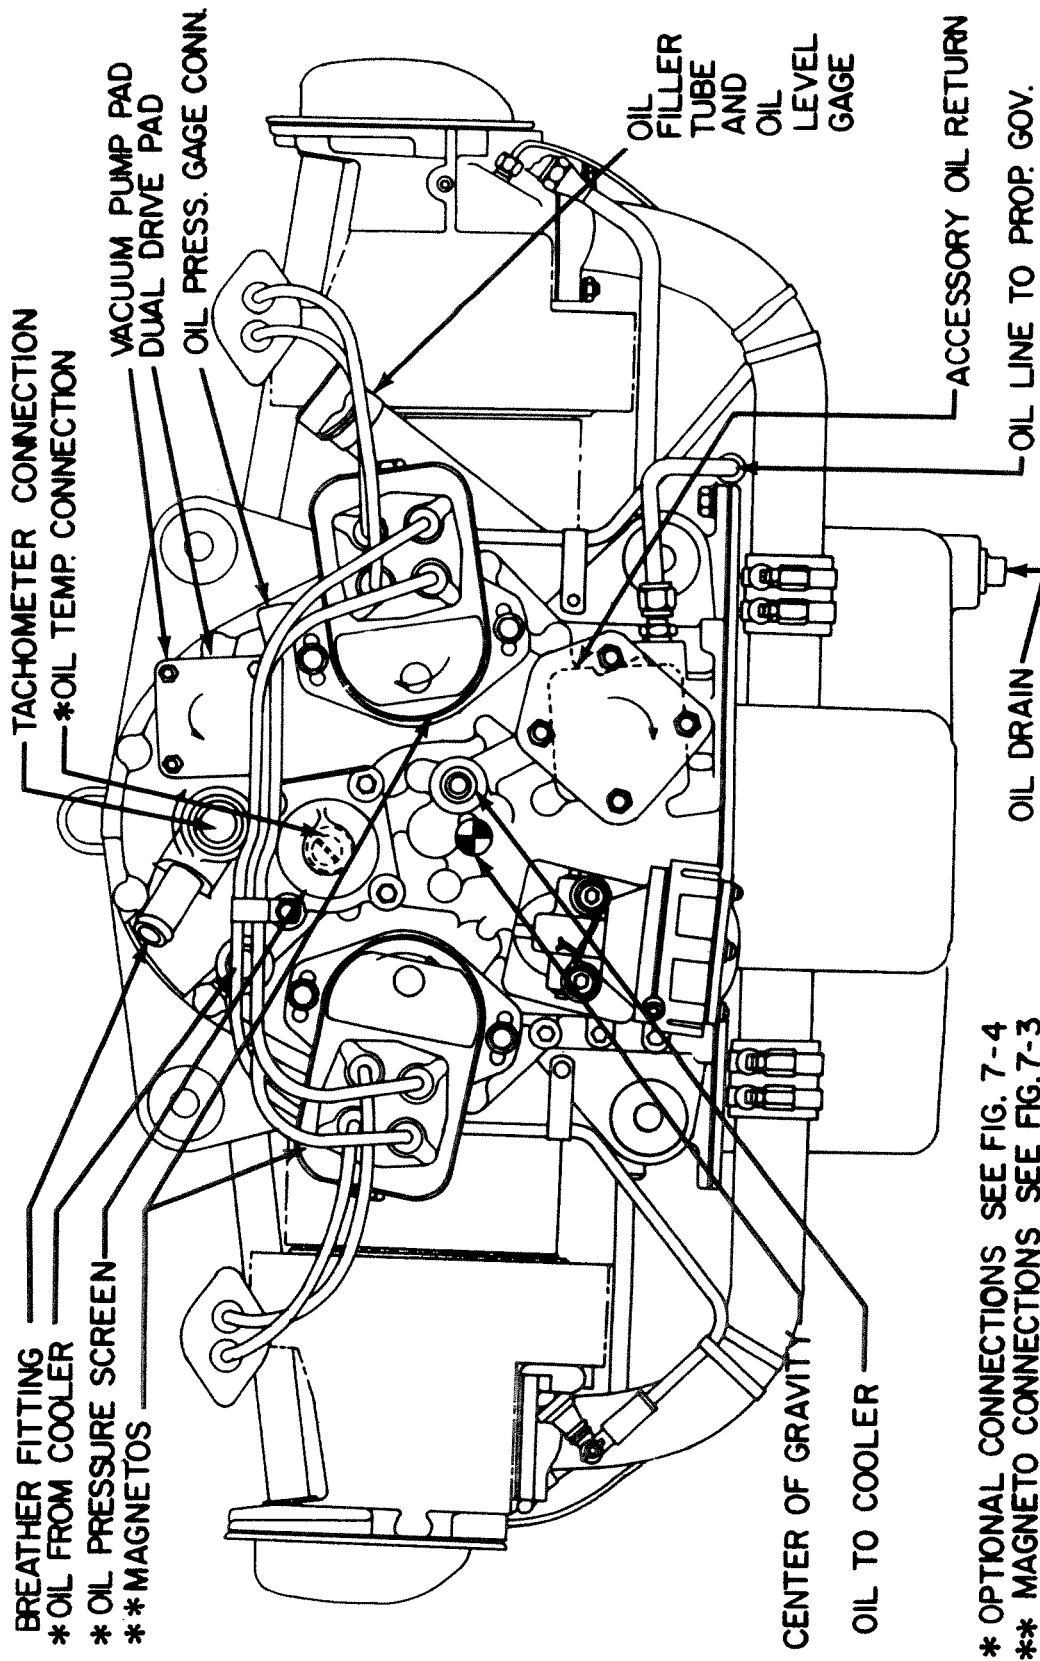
Installation Drawing Rear View - Typical O-320-A, -B Series
